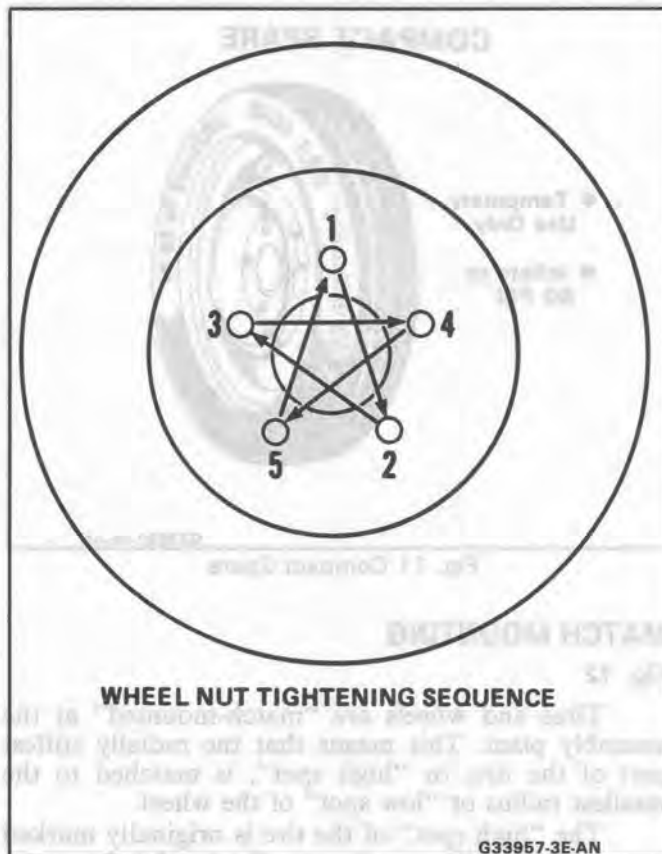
5 Hole Wheel Nut Tightening Sequence
